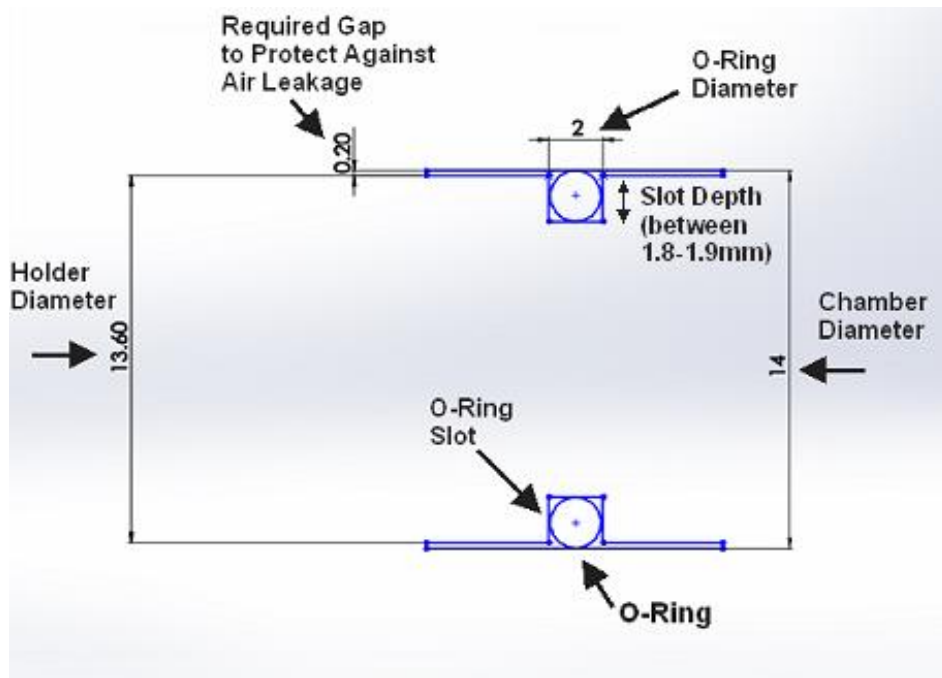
The Correct Tolerance between the Holder Diameter and the Wall of the Chamber to Support against Air Leakage (Dimensions in millimeter)
